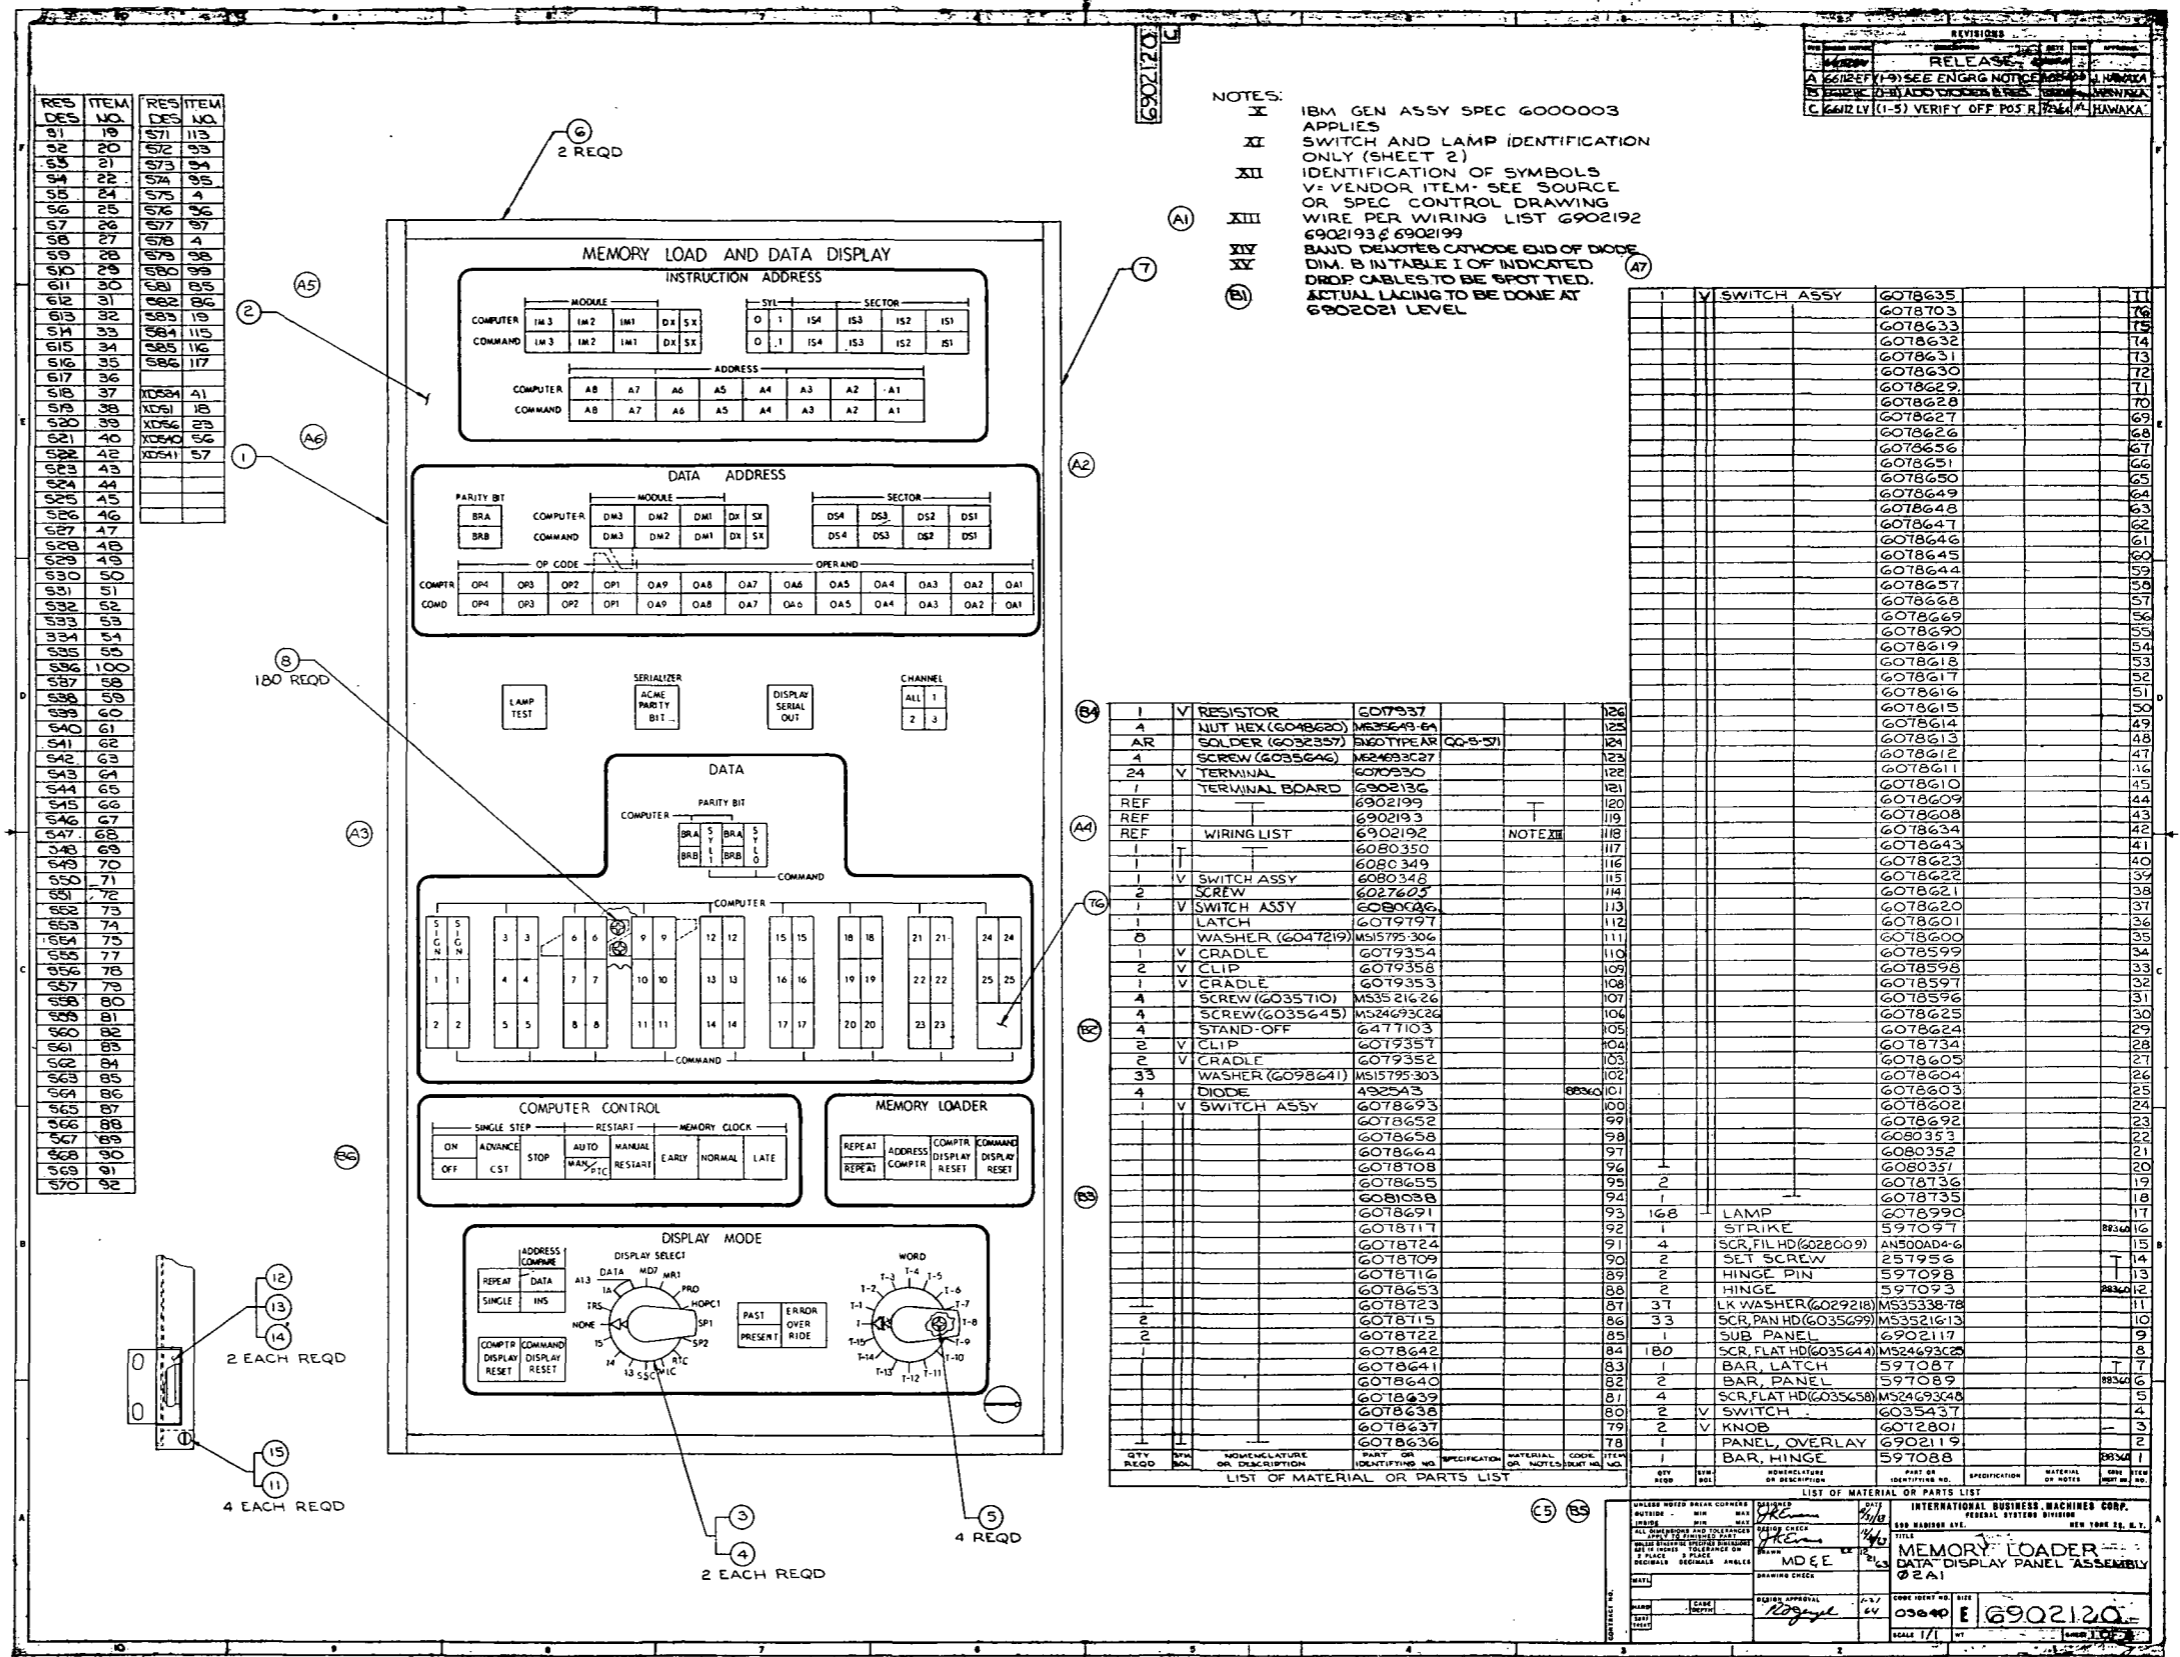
Memory Loader and Data Display Panel (02A1) Assembly Drawing (Sheet 1 of 2)
